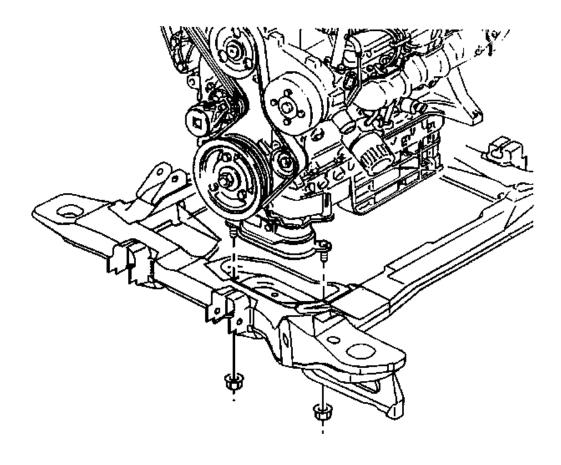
Identifying Engine Mount Lower Nuts Courtesy of GENERAL MOTORS CORP.
